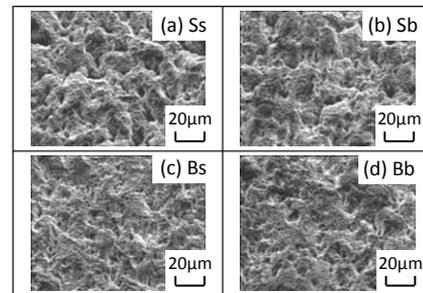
PCD surface condition after rough machining (1st cut cond.).
